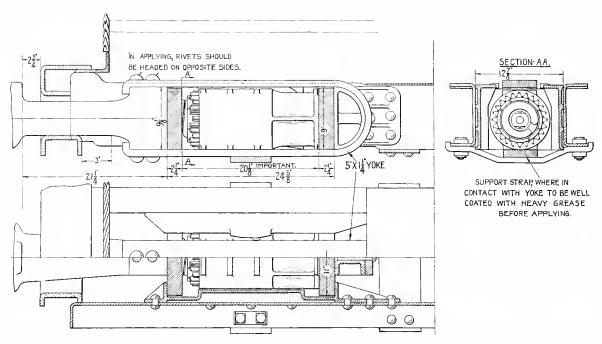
Westinghouse Friction Draft Gear for Freight Cars, with Universal Attachments and Yoke. Westinghouse Air Brake Company.
